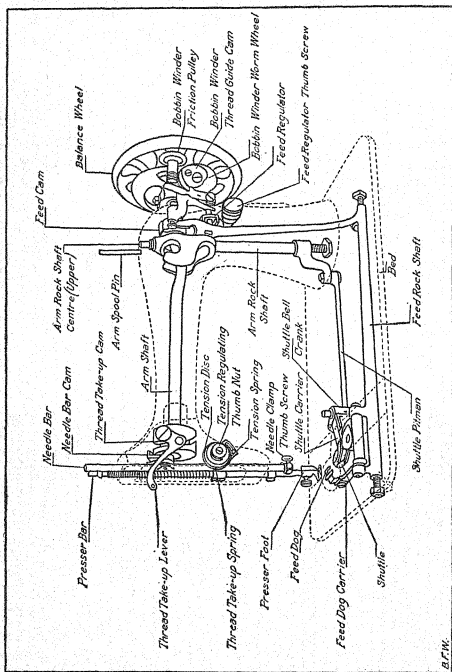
The mechanism of a sewing machine — oscillating shuttle type.
